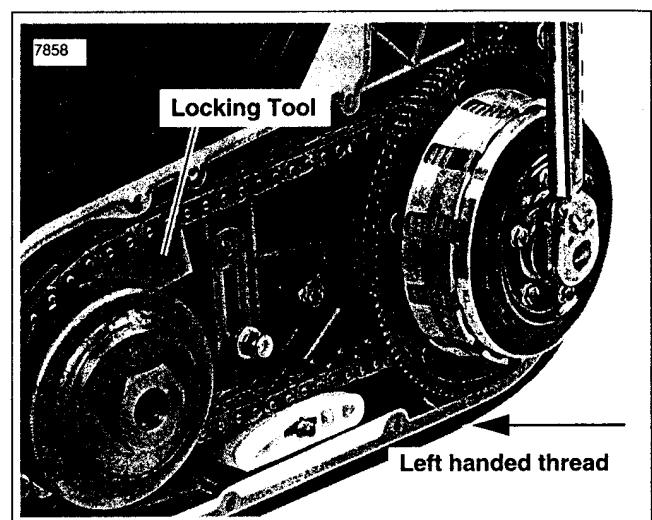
Installing Clutch Hub Mainshaft Nut
